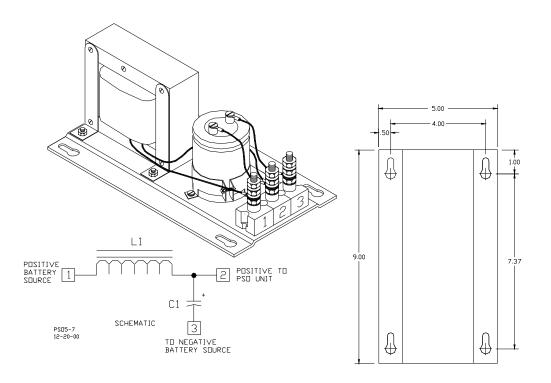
Battery Line Filter, 7A418, With Mounting Dimensions
